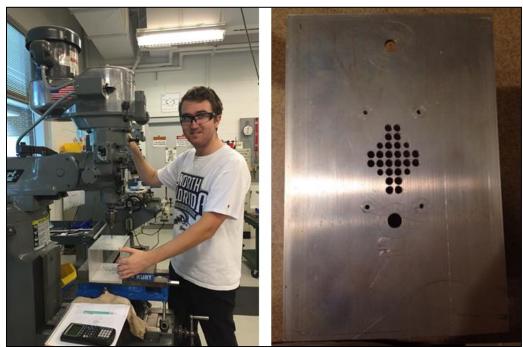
(a) Mathew is fabricating the payload body and (b) View of one side of the payload body
